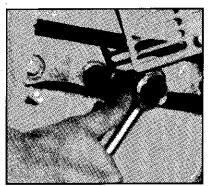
KNIFE BOLT REMOVAL OR INSTALLATION (24" CHIPPER SHOWN)
